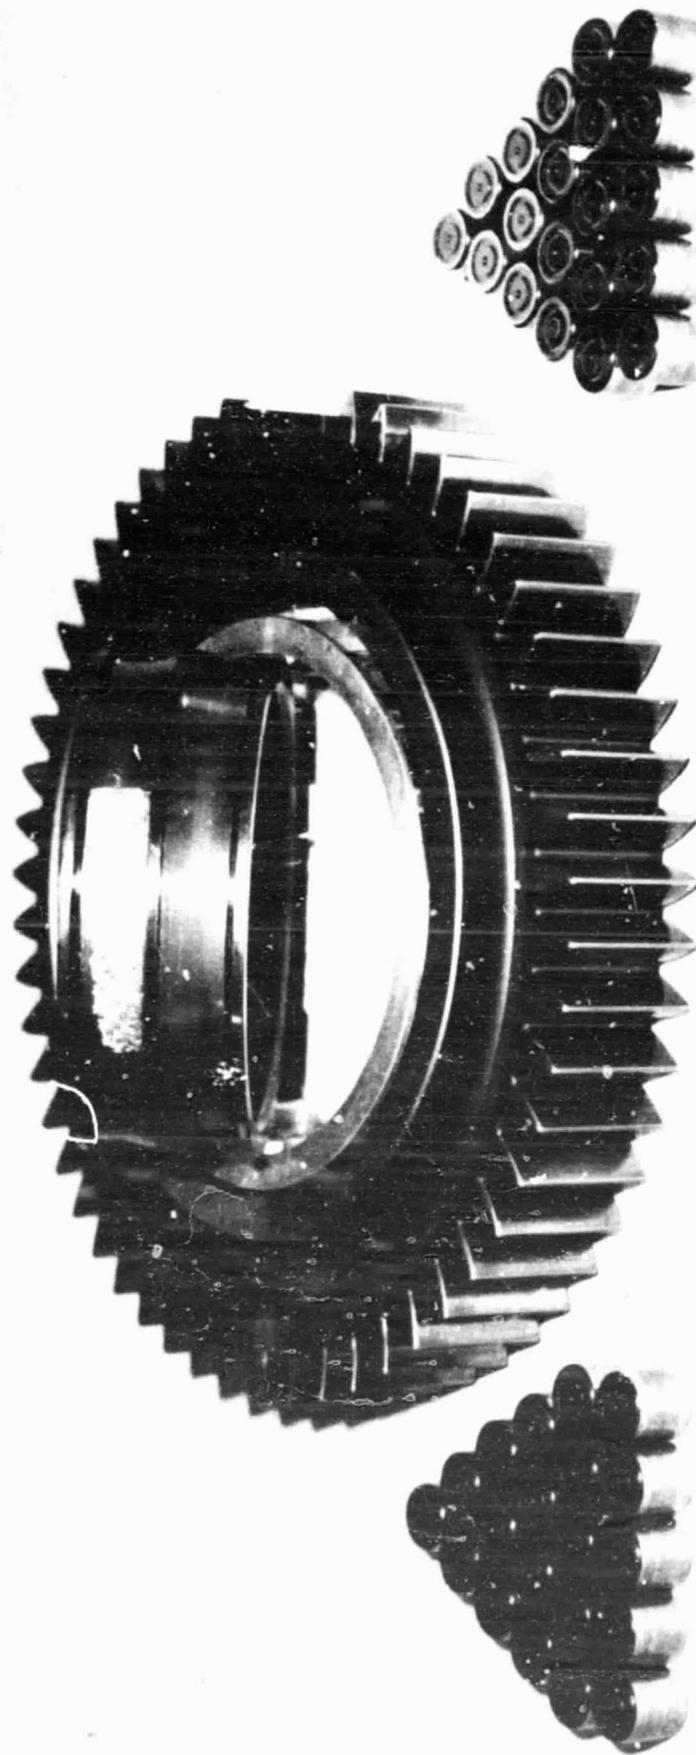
FIRST STAGE PLANET BEARING - SPALLED BEARING INNER RACE
